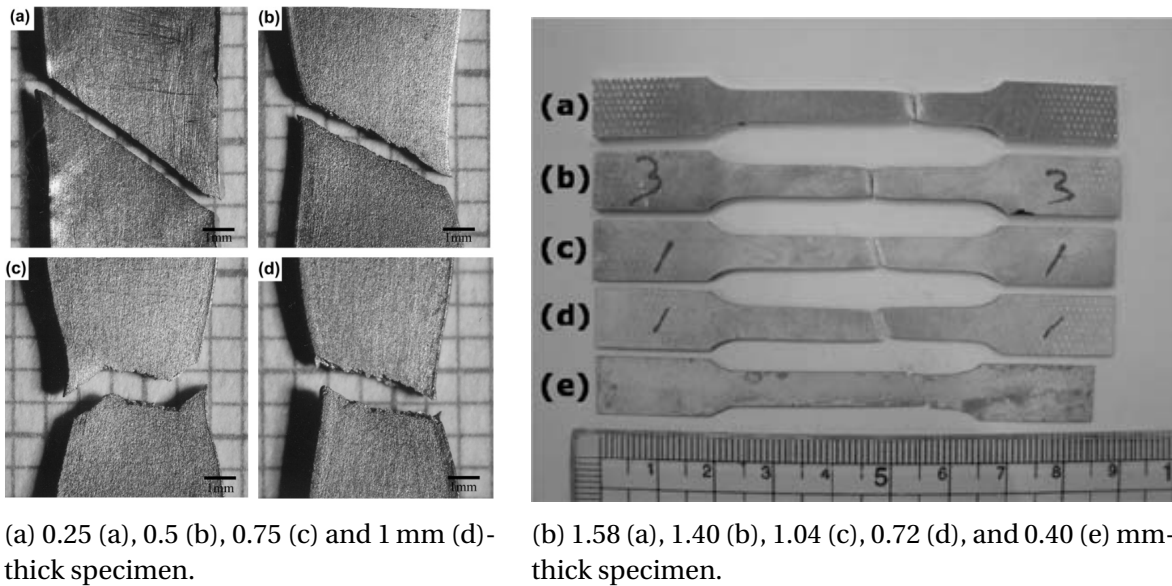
(a) The stereo tensile fracture surfaces of a commercially pure titanium specimens with different thicknesses [Nasiri-Abarbekoh et al., 2013] (b) An aluminum alloy (6K21-T4) [Suh et al., 2010]
